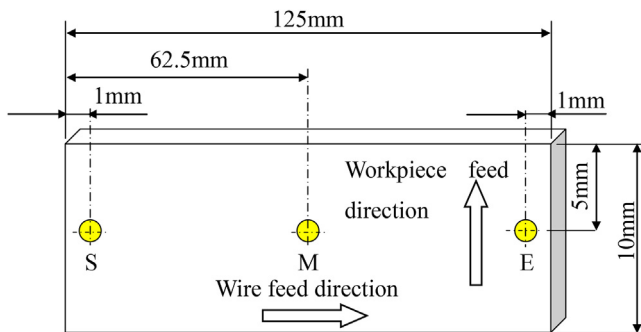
Cross section of workpiece showing measurement points: wire entrance side (S), middle of the workpiece (M), wire exit side (E).
